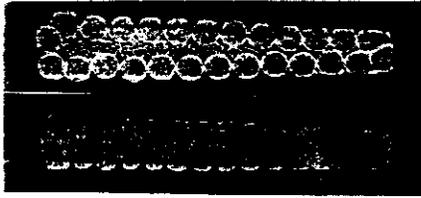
Picture of the cross section of large-ly keystone cables. The upper and lower photographs indicate the cables with 23 and 30 strands, respectively.
